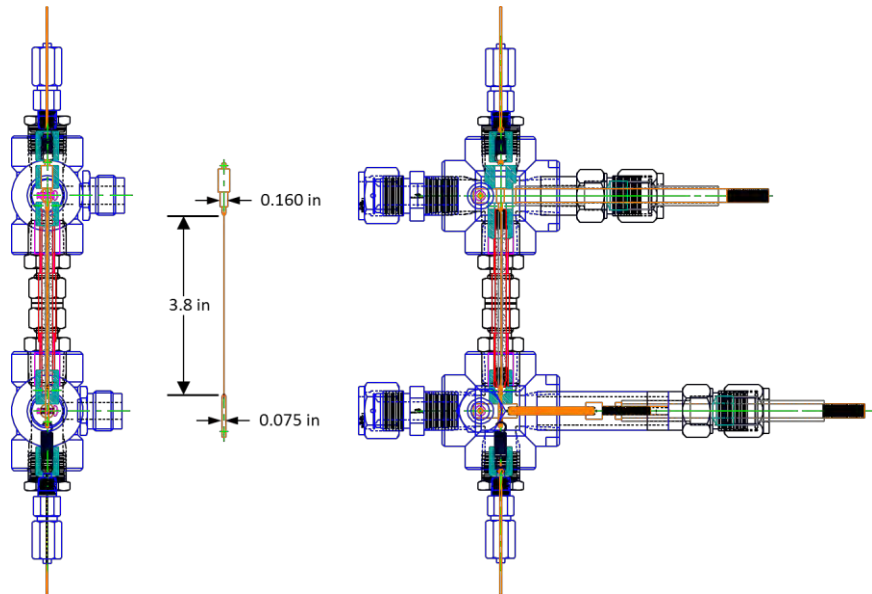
AutoCAD assembly drawing of the High Heat Flux test section and copper wire insert.
